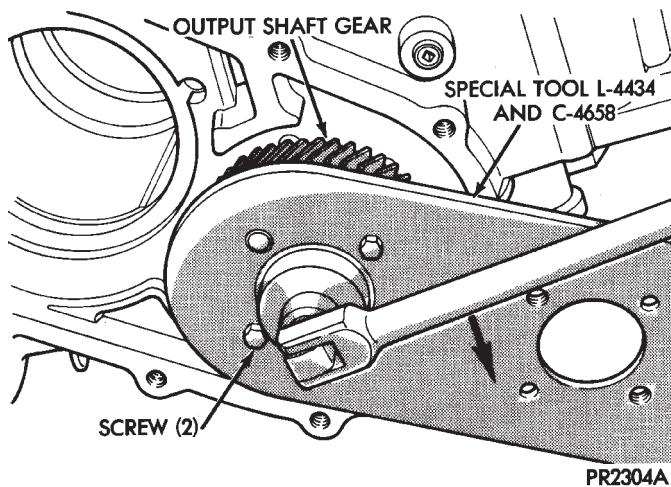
Start Output Shaft Gear onto Output Shaft
